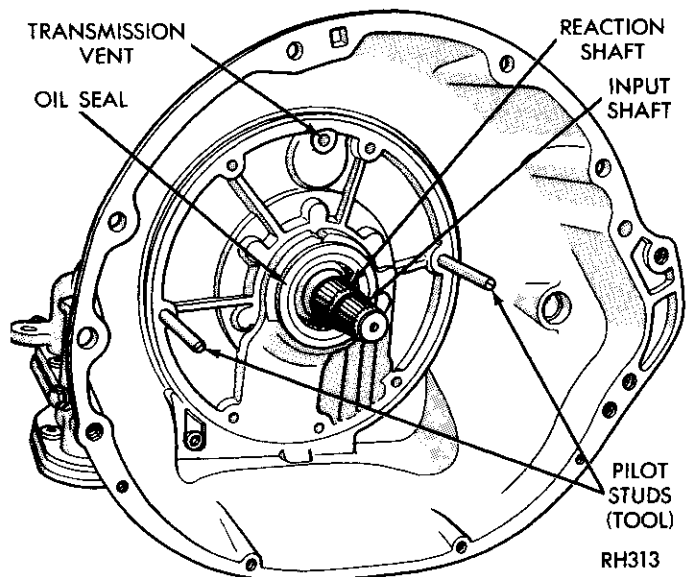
Installing Oil Pump And Reaction Shaft Support
